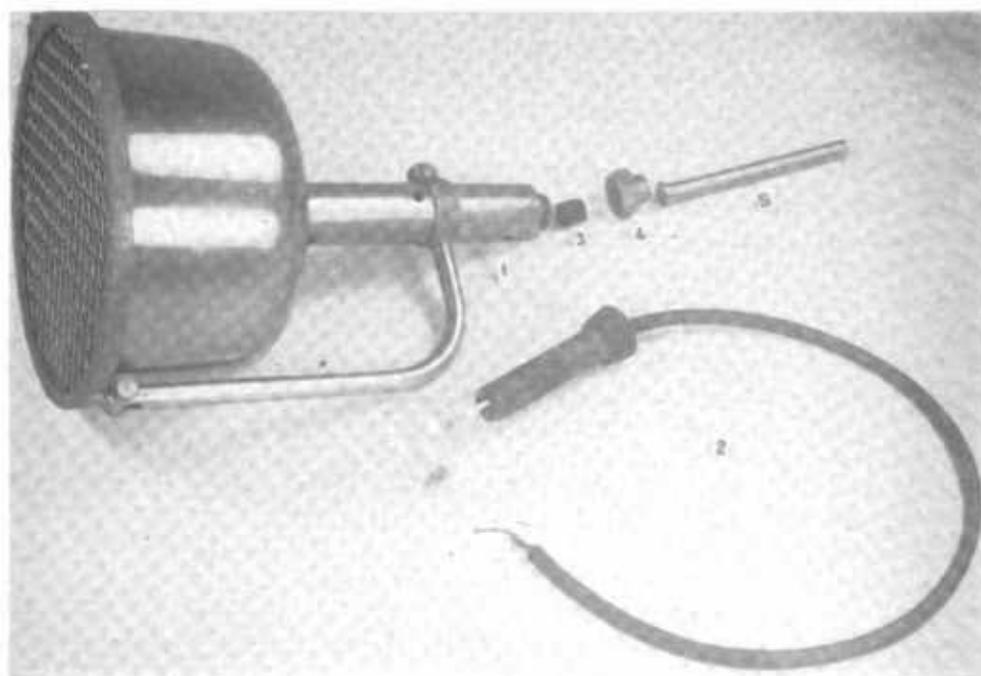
Diving light, Westinghouse Lamp Co. type—Disassembled.
